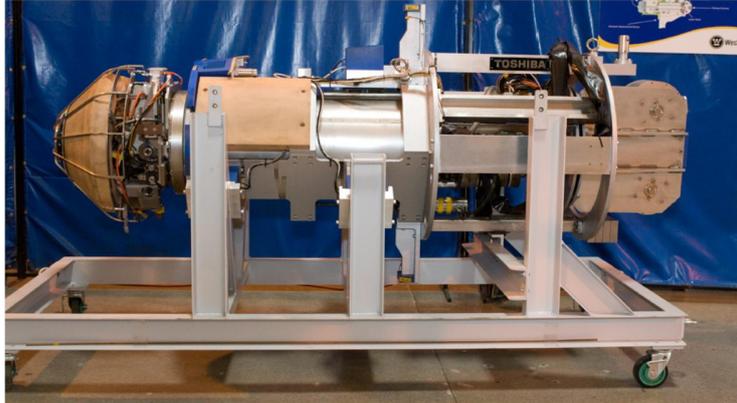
Underwater laser welding machine used by Westinghouse [45].
